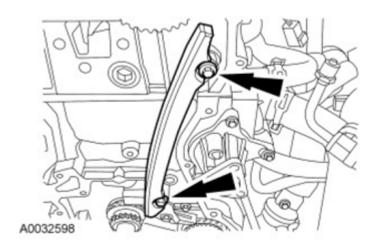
Locating Timing Chain Guide Bolts Courtesy of FORD MOTOR CO.
